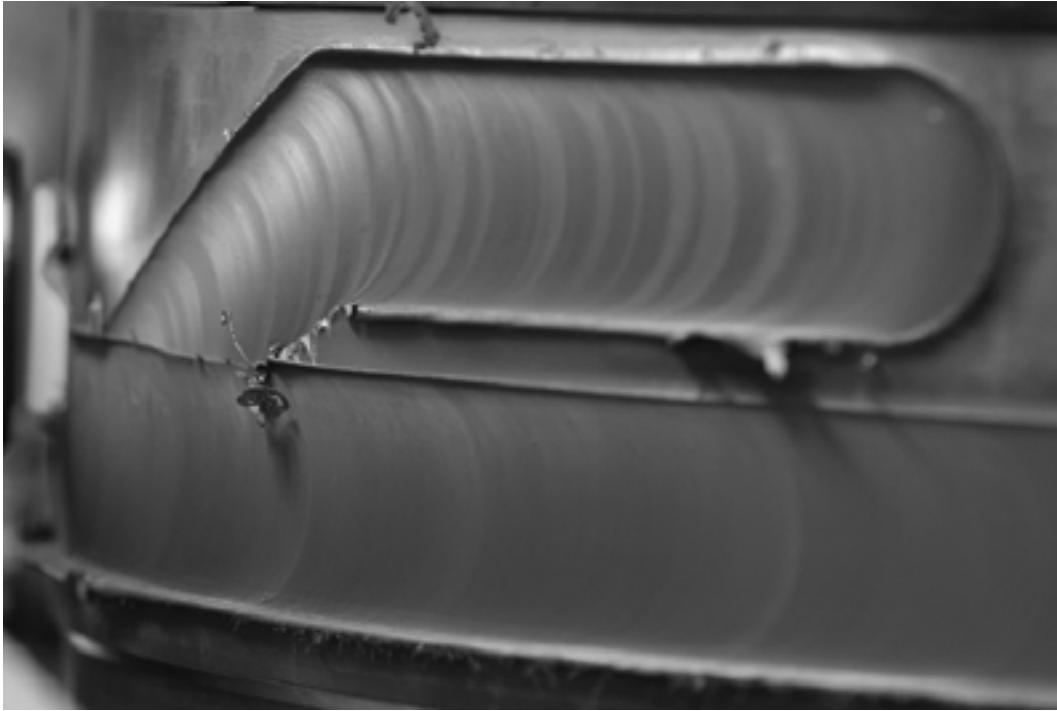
The weld after fabrication. On the top of the weld is the start area where the tool is inserted and the weld begun. After the initial transients have abated the tool is lowered to the make the weld. When the whole weld is completed a certain overlap is made which is visible in the image, and then the tool is parked above the weld in a similar fashion as the start area. When the tool is finally withdrawn a hole results and this has to be placed in an area where it can be machined away.
